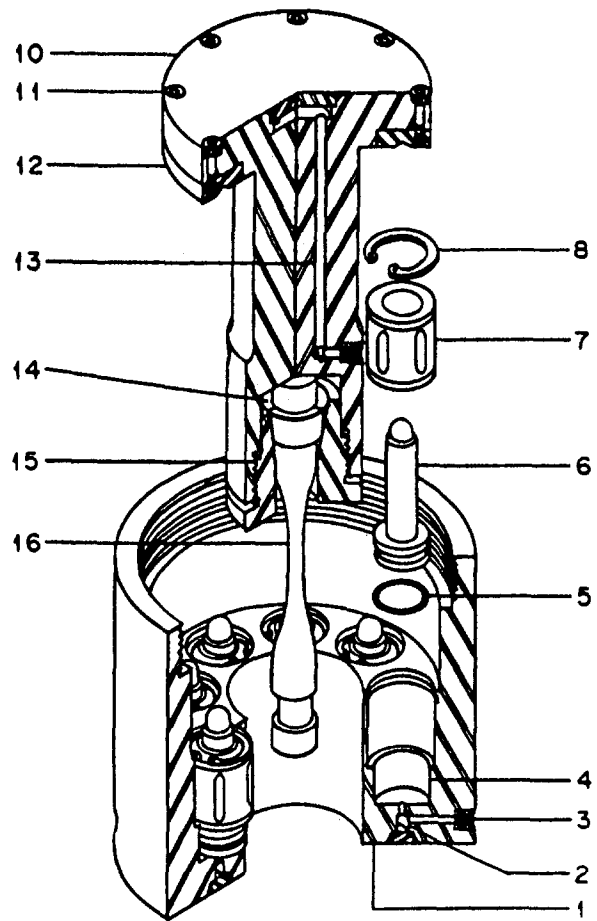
Details of the self-aligning universal coupler used in tensile testing
